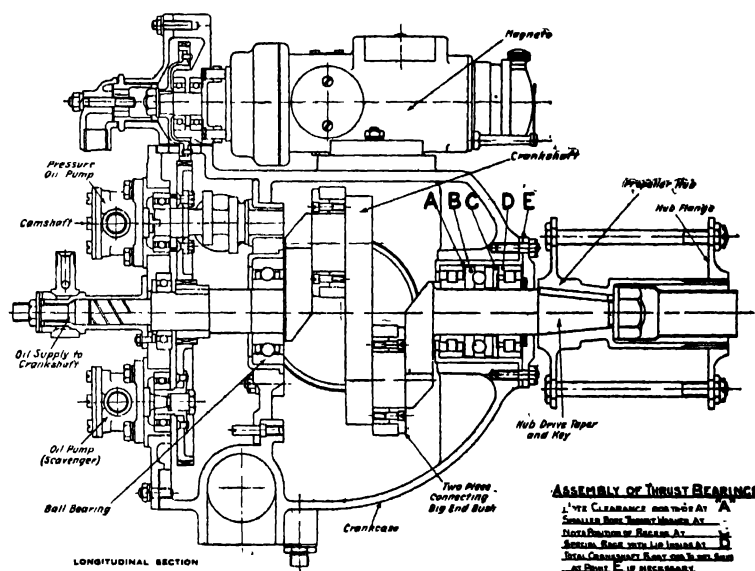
D.—Longitudinal Section of "Scorpion" Engine Showing Ball Bearings and Thrust Bearing Assembly.
